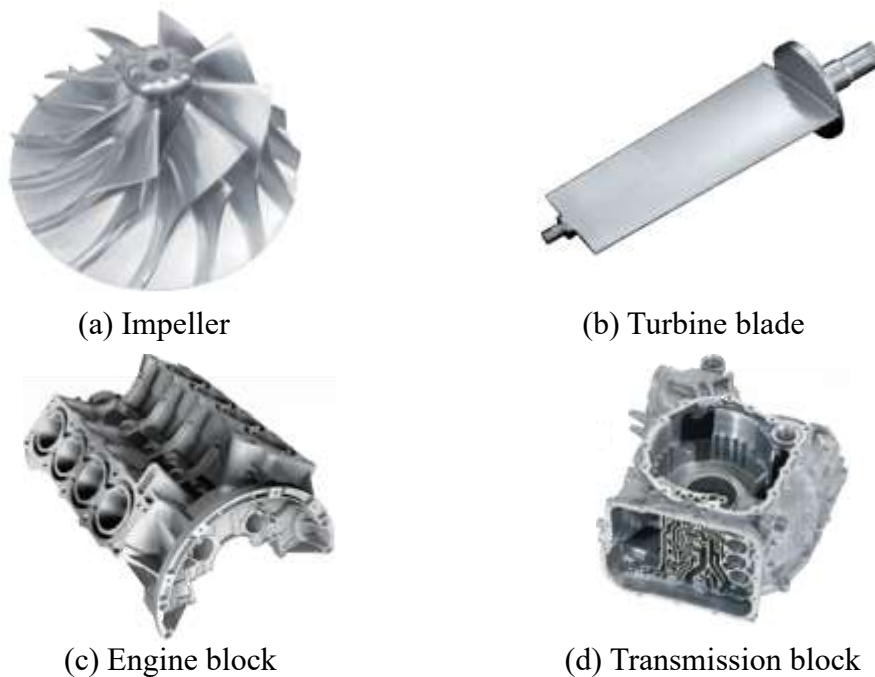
The complex shape parts machined in five-axis controlled machine tool
